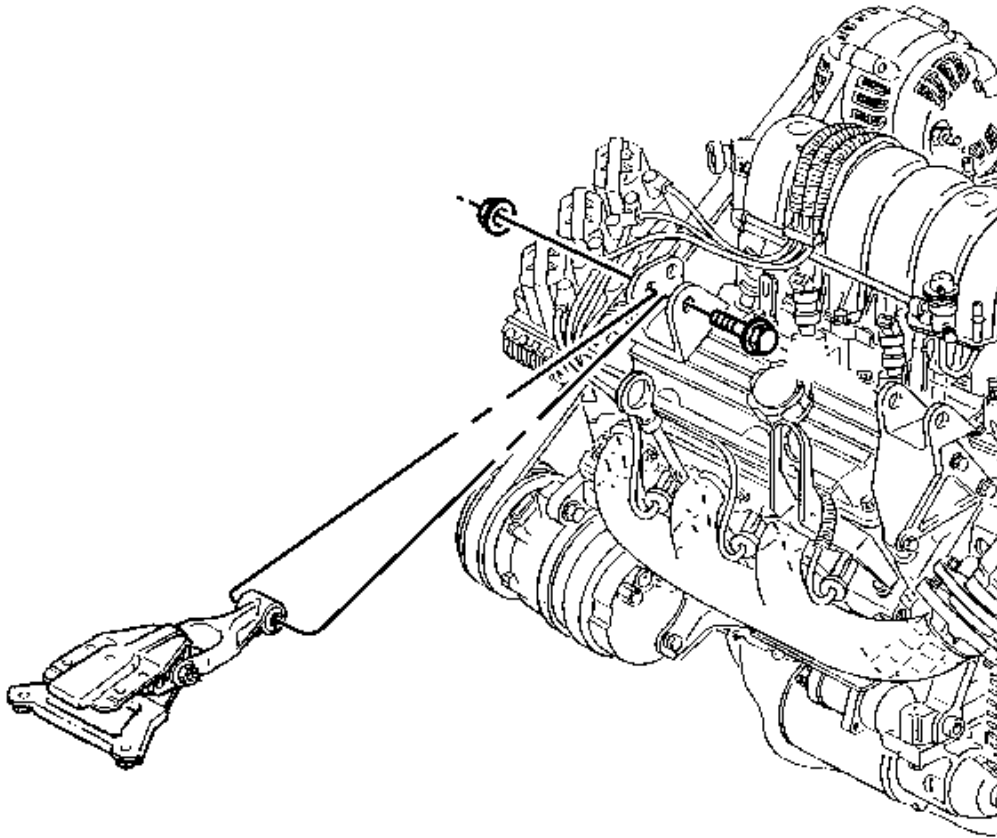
Installing Right Engine Mount Strut To Upper Engine Mount Strut Bracket
